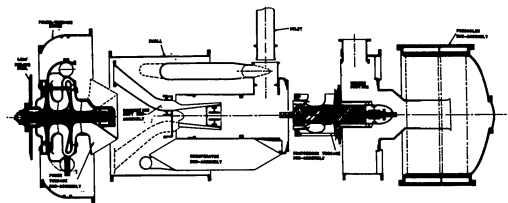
Exploded View of Machinery Set Sub-Assemblies
